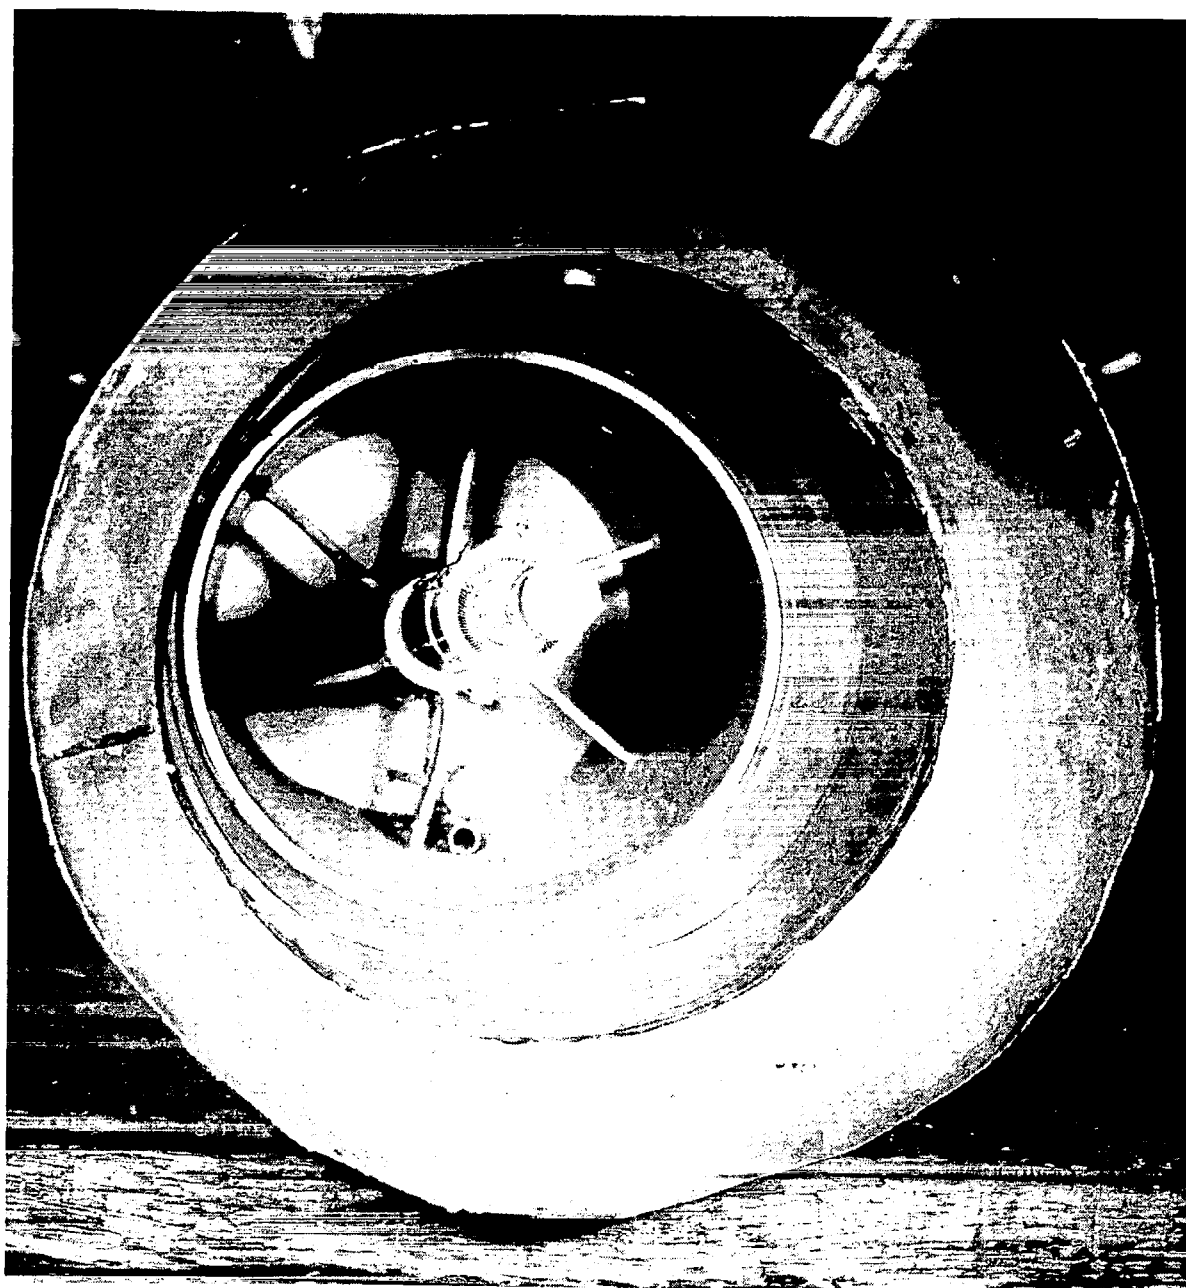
Simulated Shaft Assembly Mounted in Braze Retort
